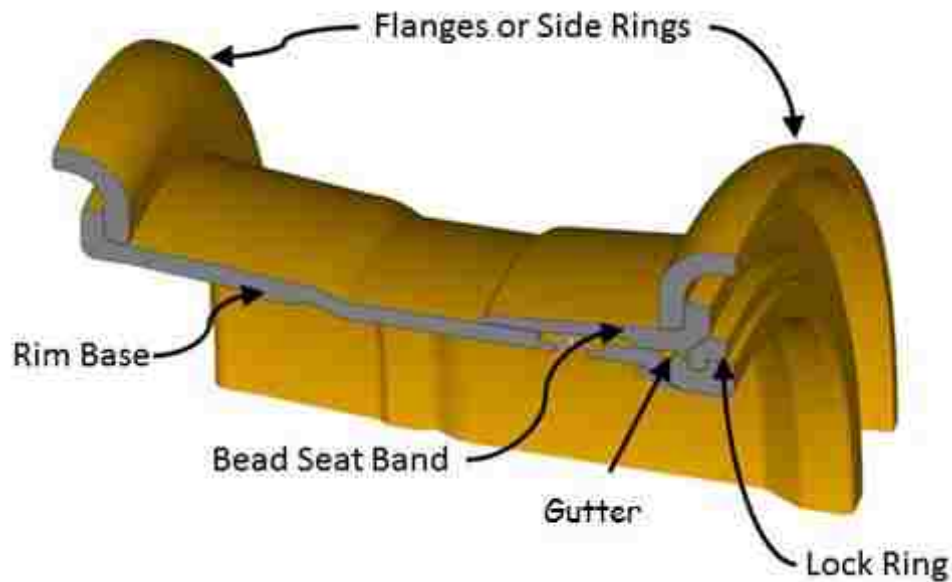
Cross-sectional view of a five-piece wheel assembly [7]
